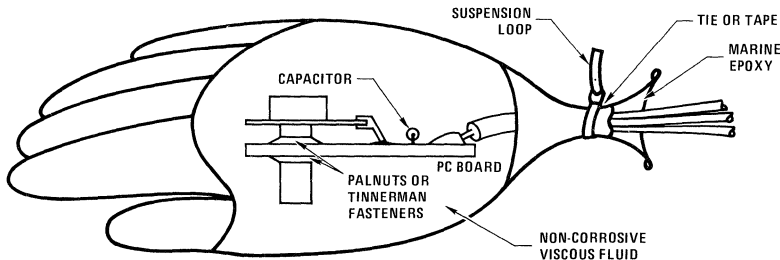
LX16XXF Installed in Rubber Glove Assembly
